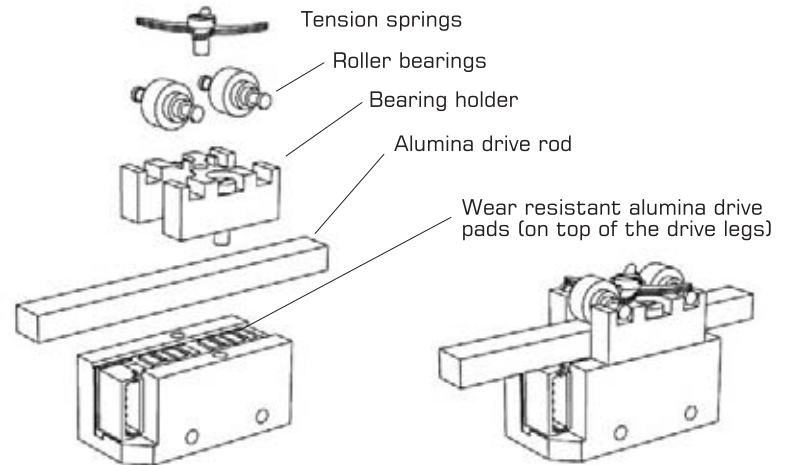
The Piezo LEGS linear motor. The exploded view on the left shows the components for a complete motor. The assembled motor is shown on the right.
